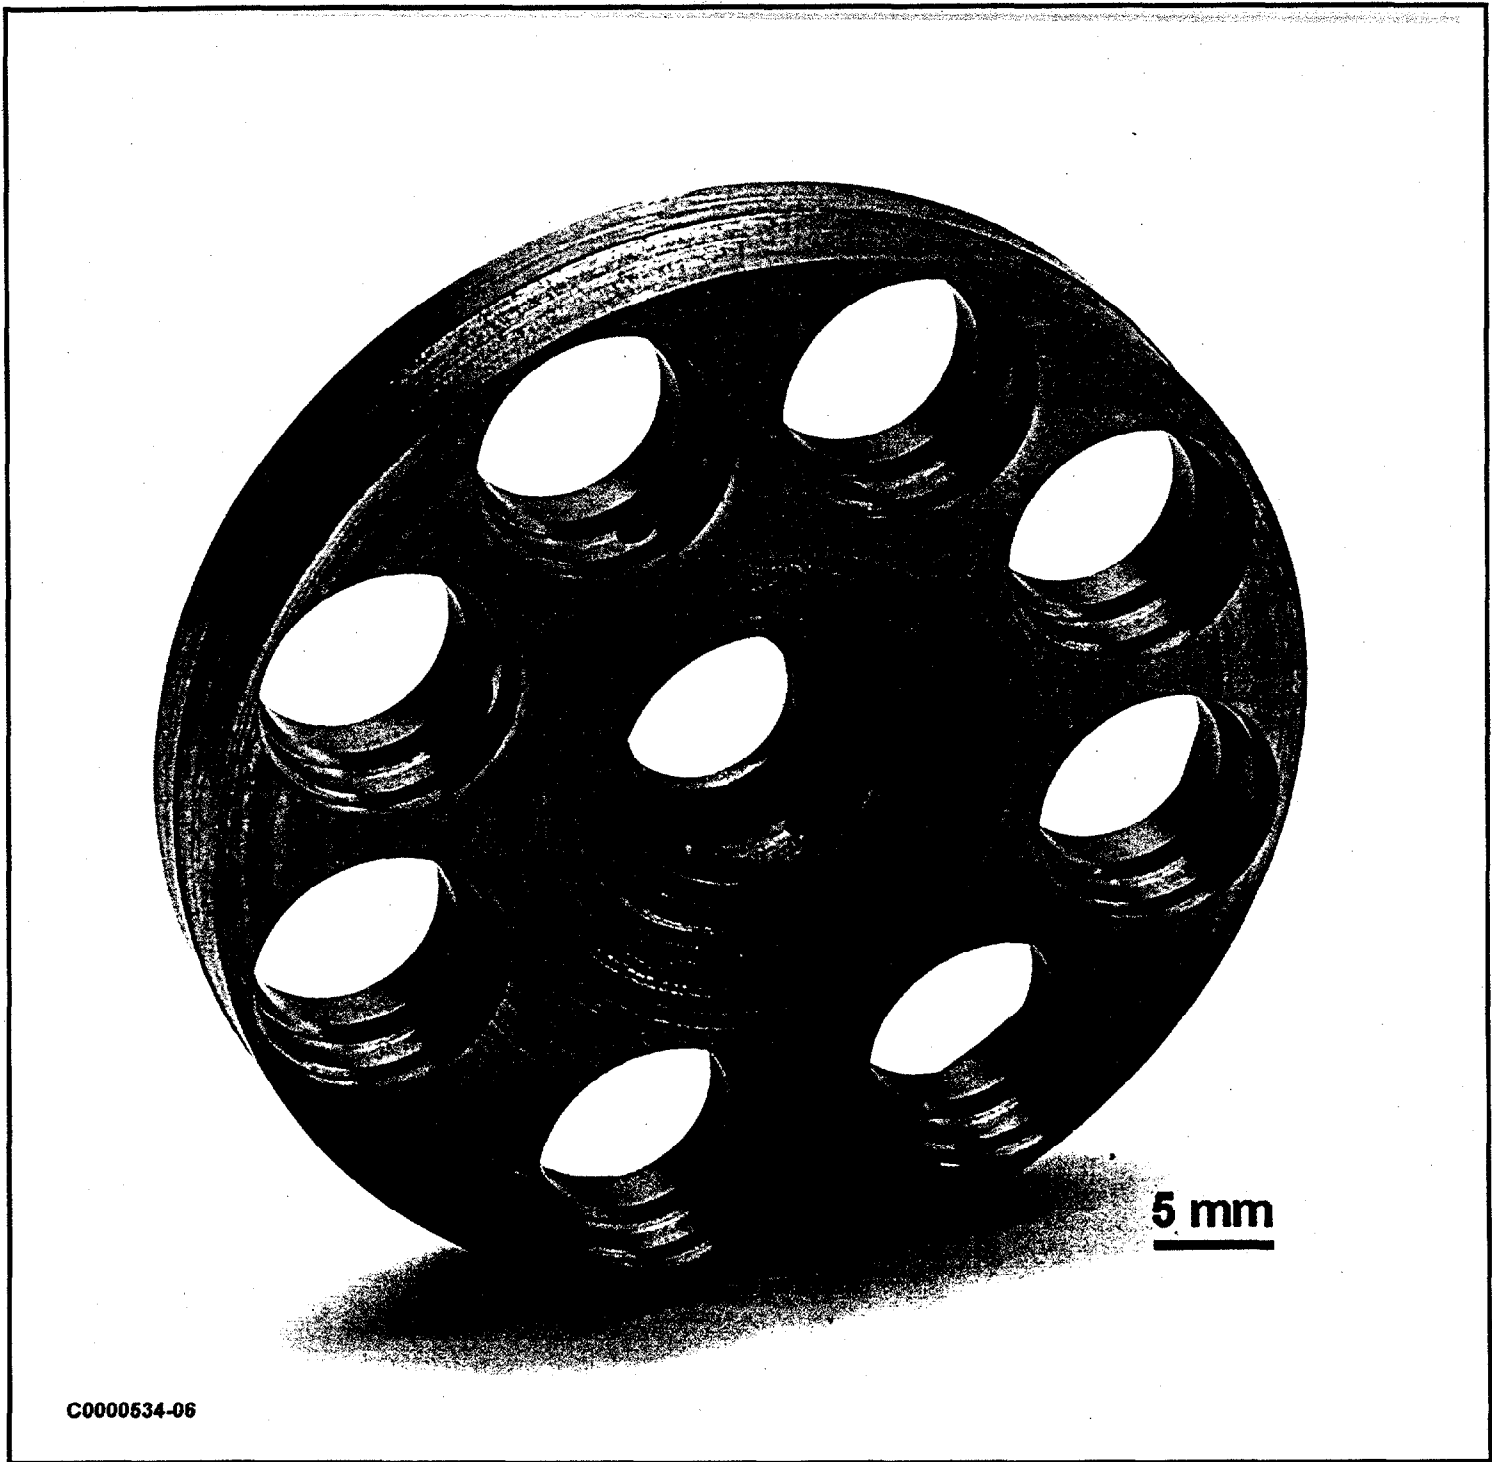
Photo of Mo-41% Re hot-end BASE support plate.
